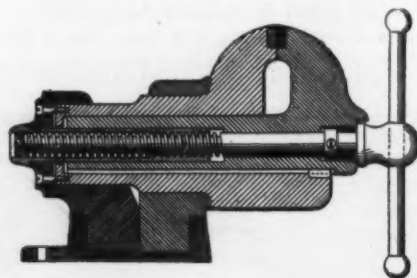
The Long Patent Universal Double Swivel Vises.
